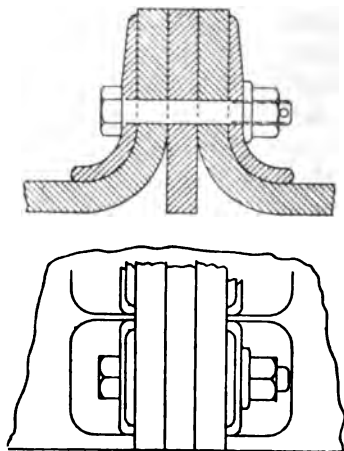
Flanged and bolted joint for belting, working at moderate speed.
